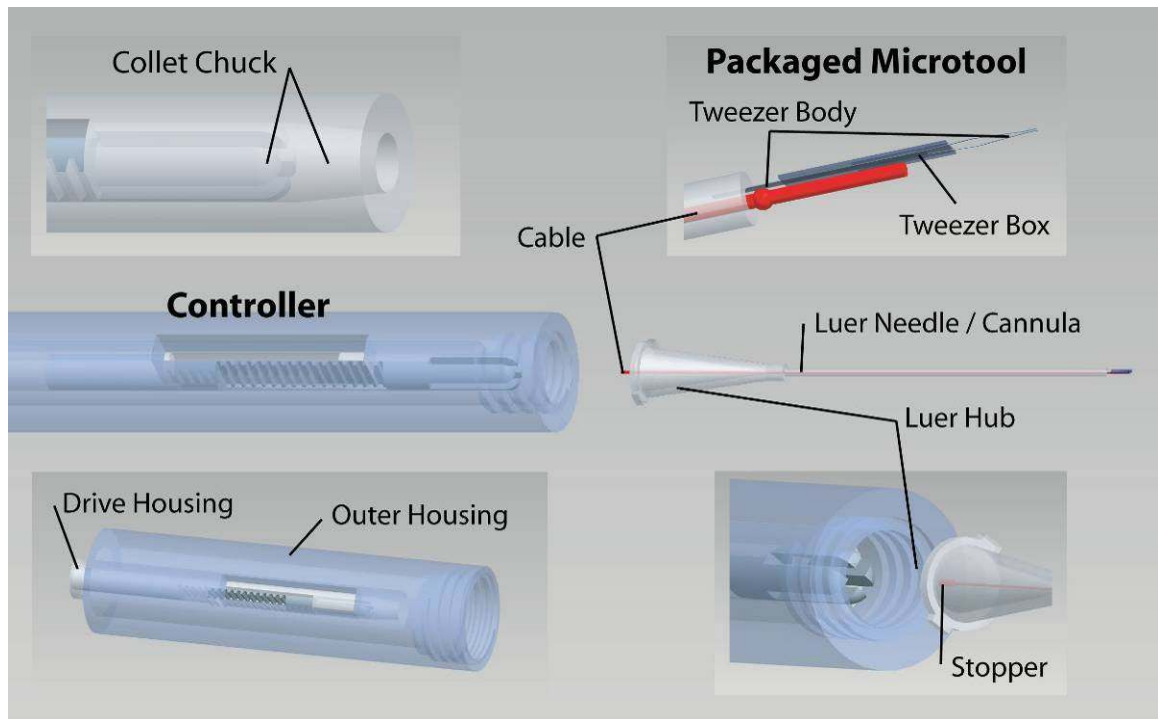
CAD drawings with labels highlighting the key features of the preliminary luer housing package and controller design. This package design used physical stops on the drive cable to control the actuation range of the MEMS device. The controller outer housing contained a docking interface for the luer needle of the package, and an internal collet to grasp the drive cable. This collet was attached to an internal drive housing that could move linearly independent of the outer housing, causing actuation of the MEMS device.
